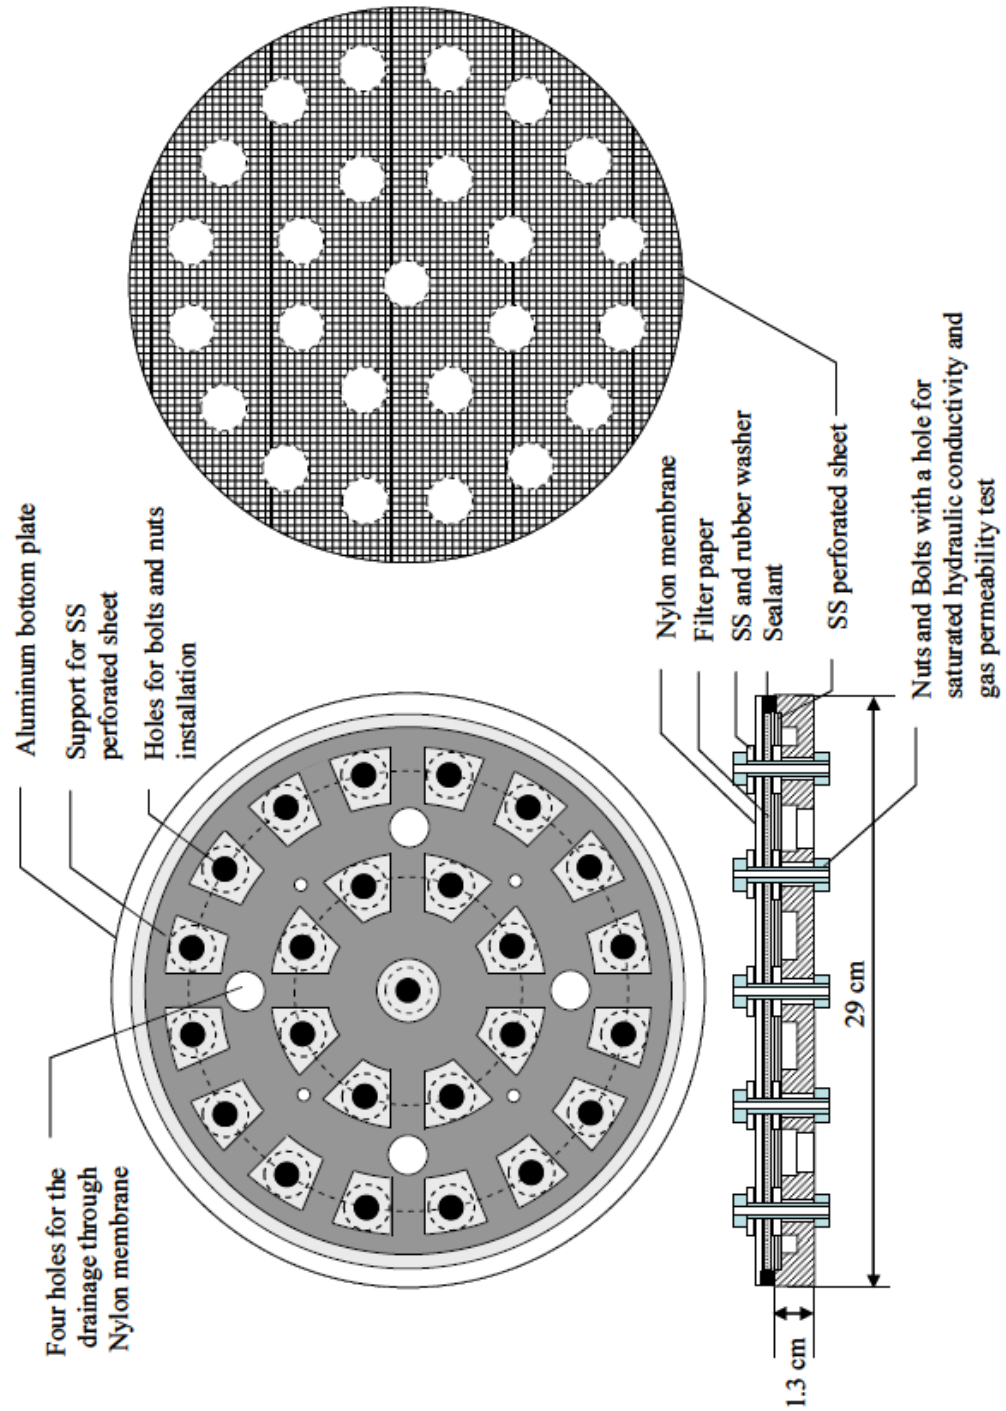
Detailed design of the bottom plate used in the newspaper tests (Han, 2009)
